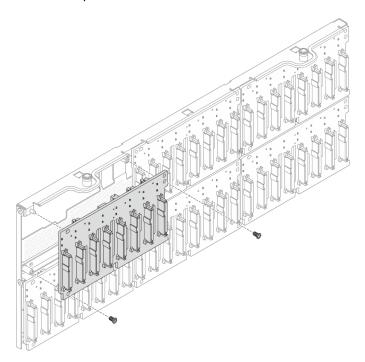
Installing backplane to carrier (2.5-inch bay chassis)
